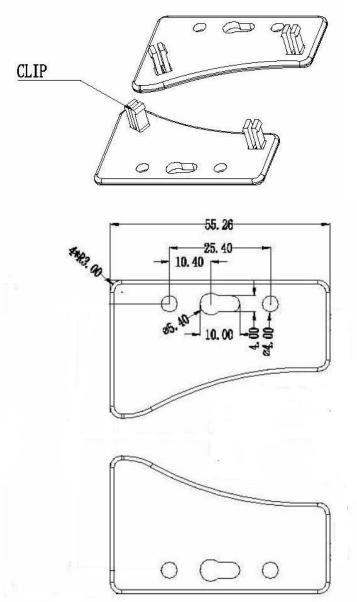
USB2-H-1004 Case Dimensions with UniClip
